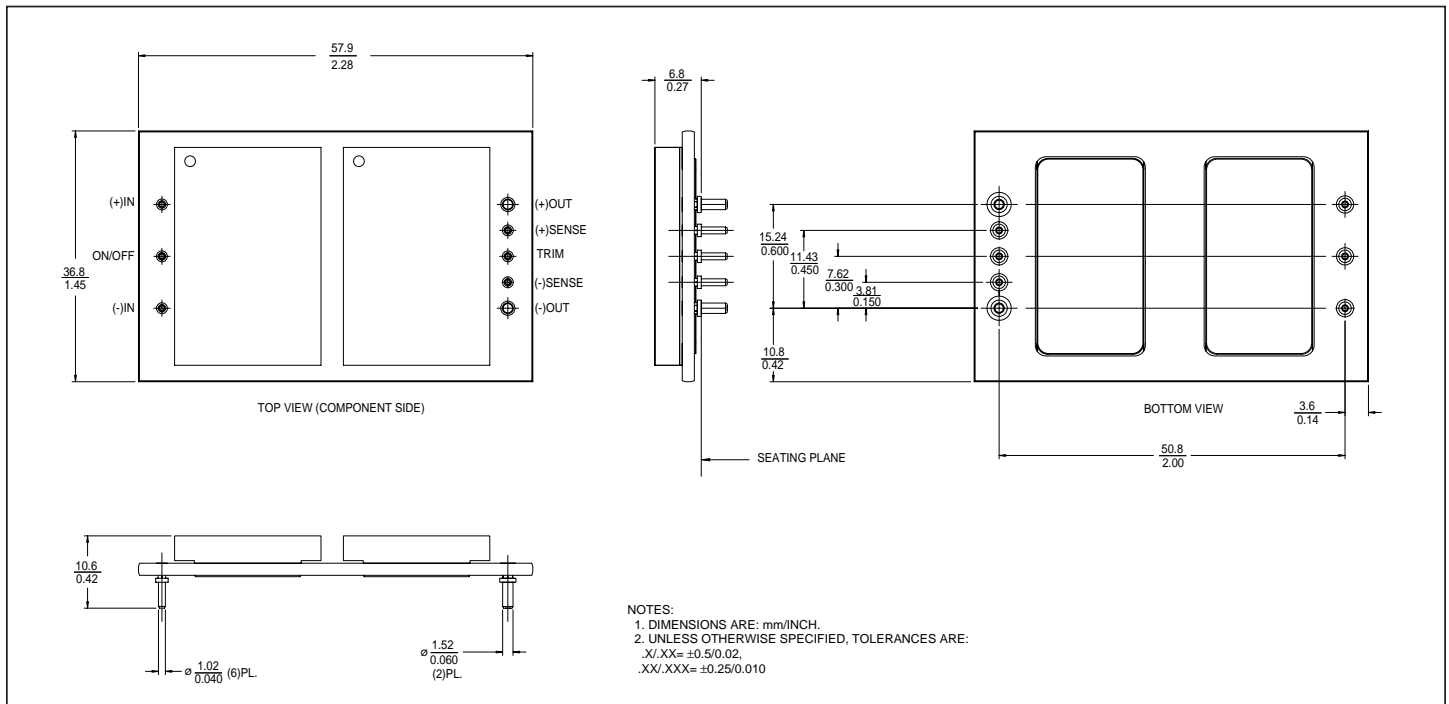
Mechanical outline and PCB footprint information; single output pin version (package style 1)
